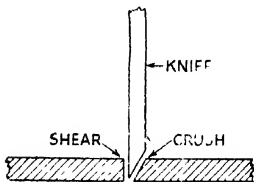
STEEL-RULE CUTTER FOR BLANKING ALUMINIUM-ALLOY SHEET MATERIAL.
